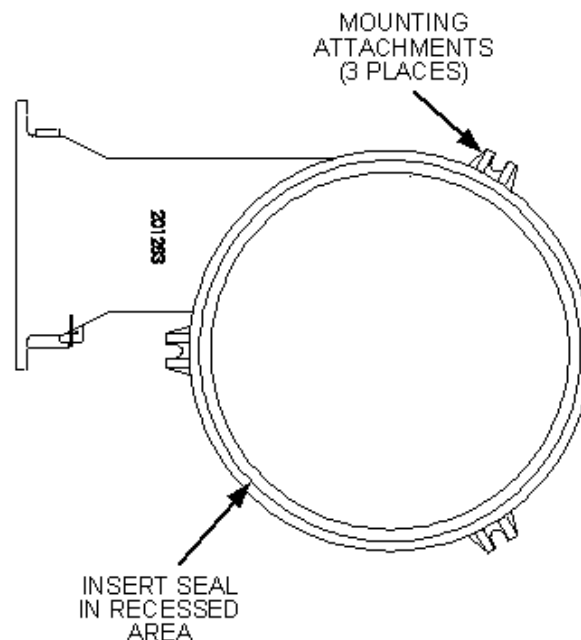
Benchmark 2.0LN (Venturi Design) Exhaust Manifold – Top View
